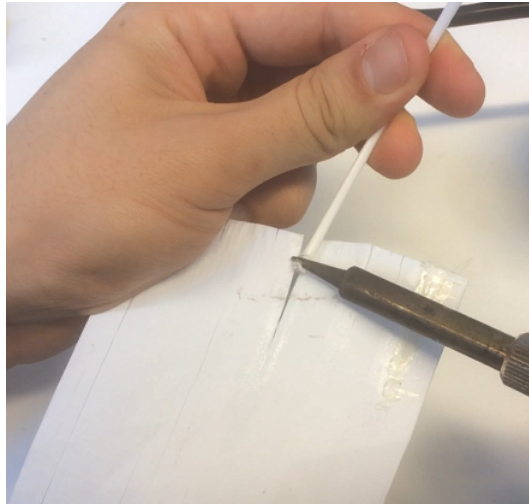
Repairing a large crack with a soldering machine(1)
